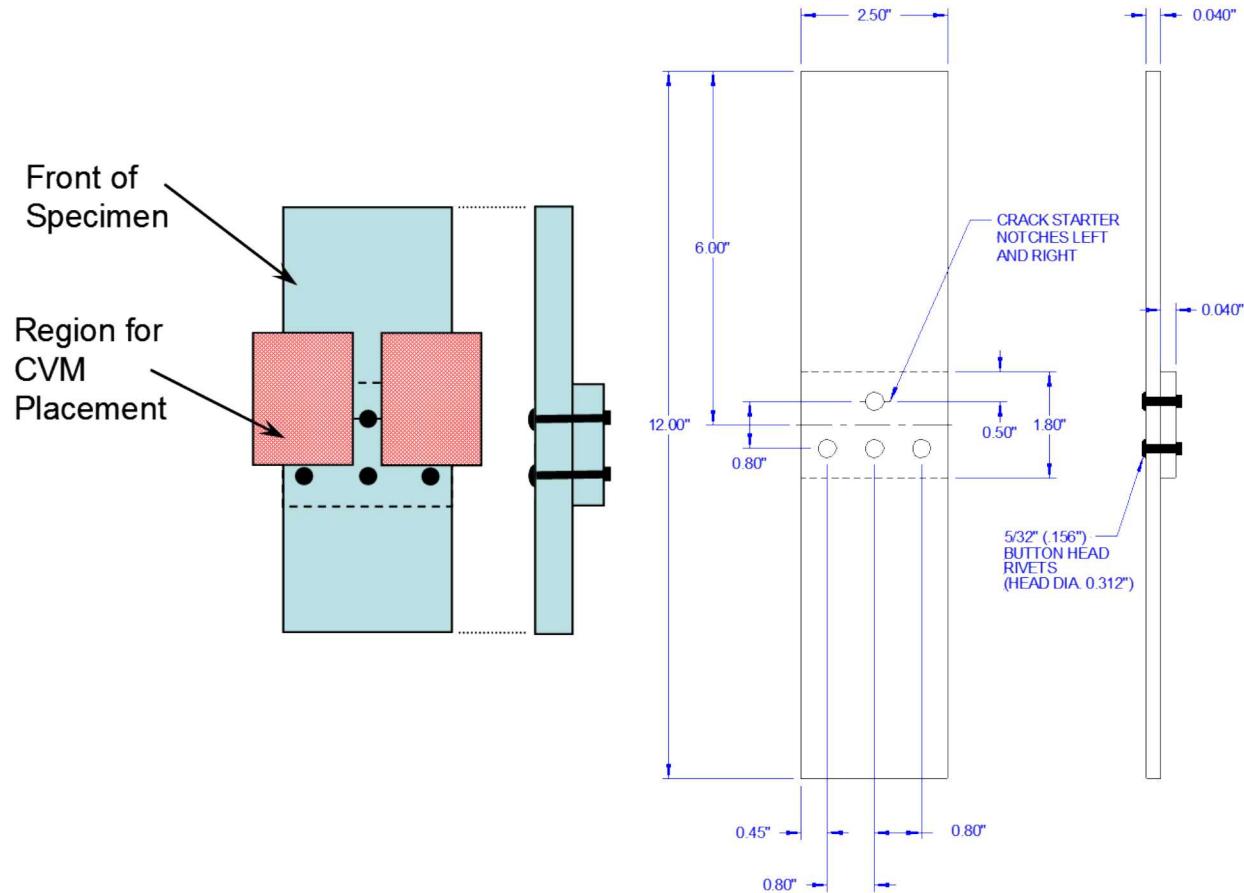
Dimensions of Test Specimen to Study Effects of CIC and CVM Placement for Crack Detection
